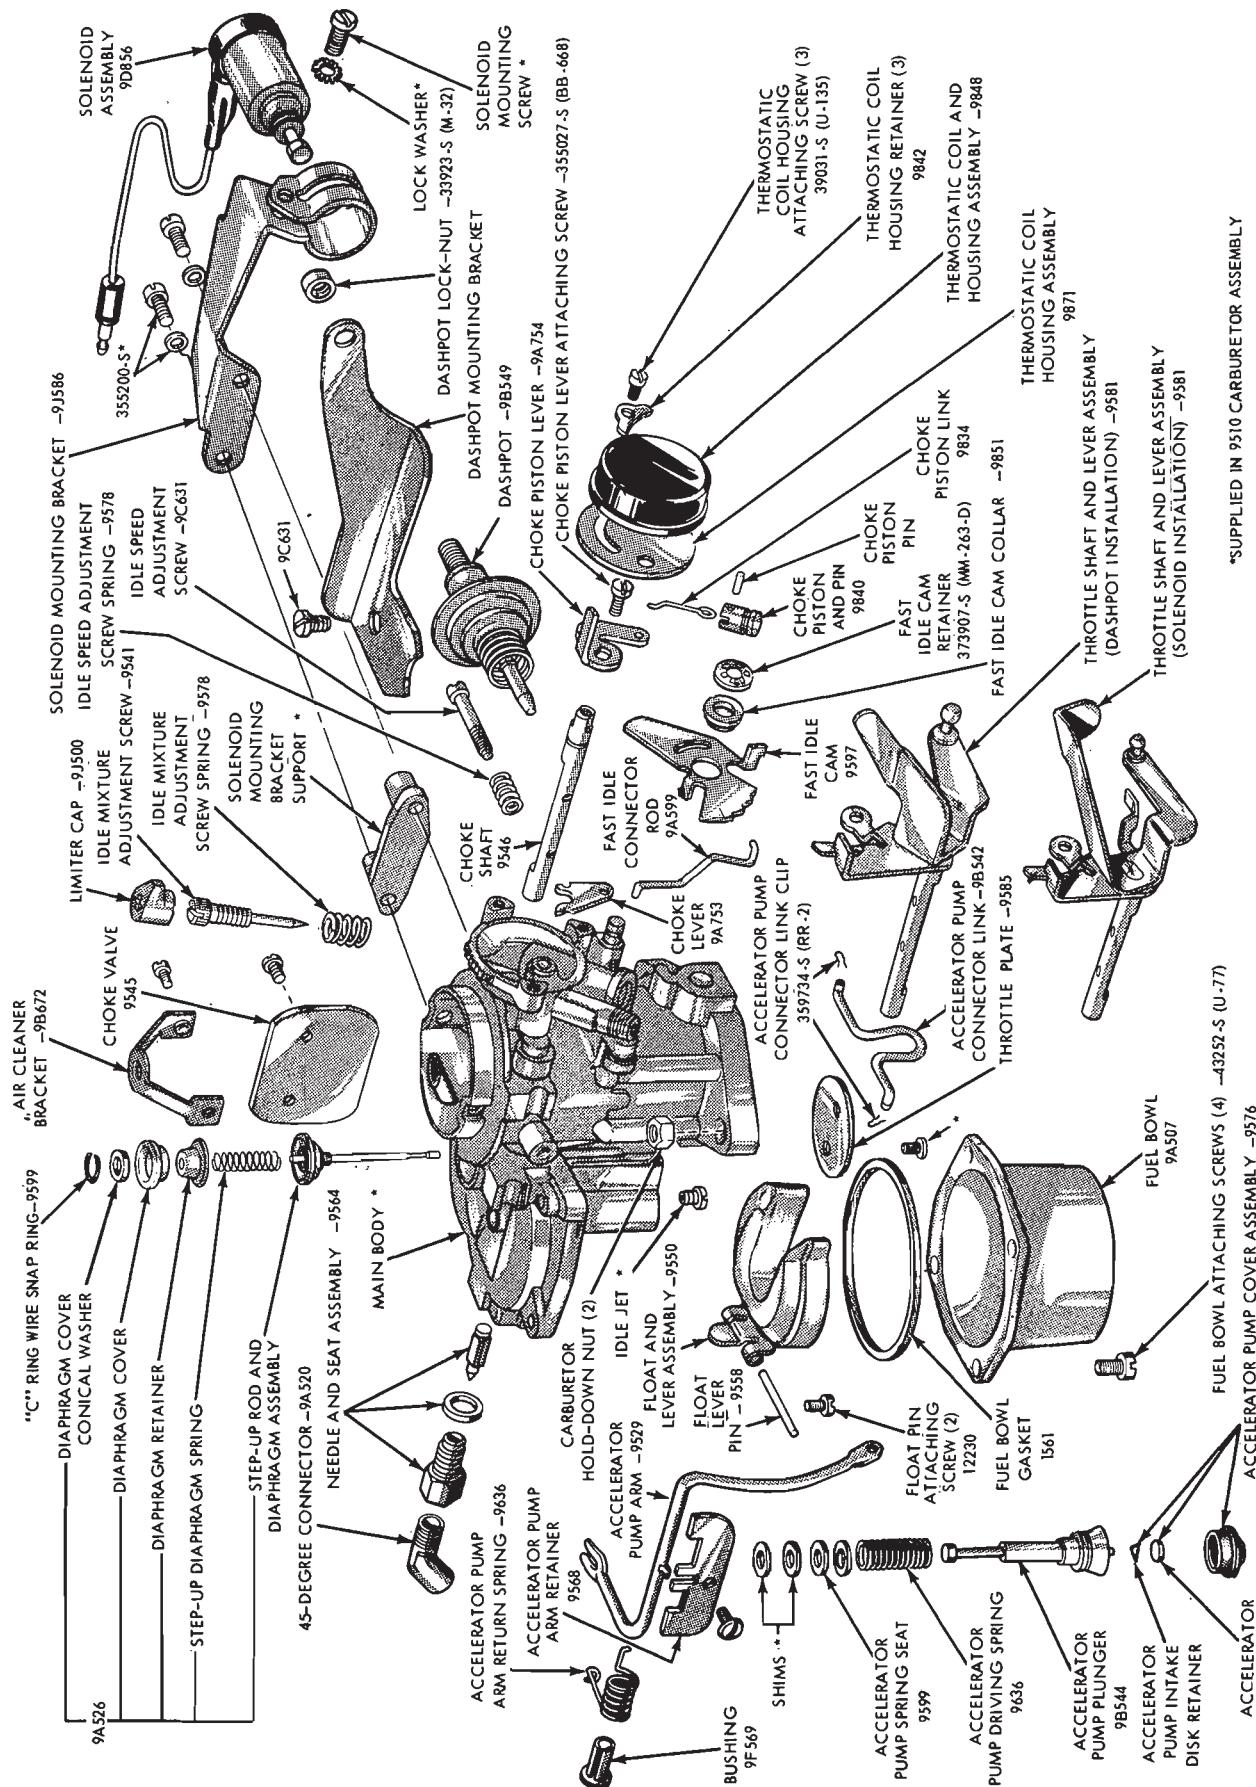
Carter Model RBS 1-V Carburetor Assembly
